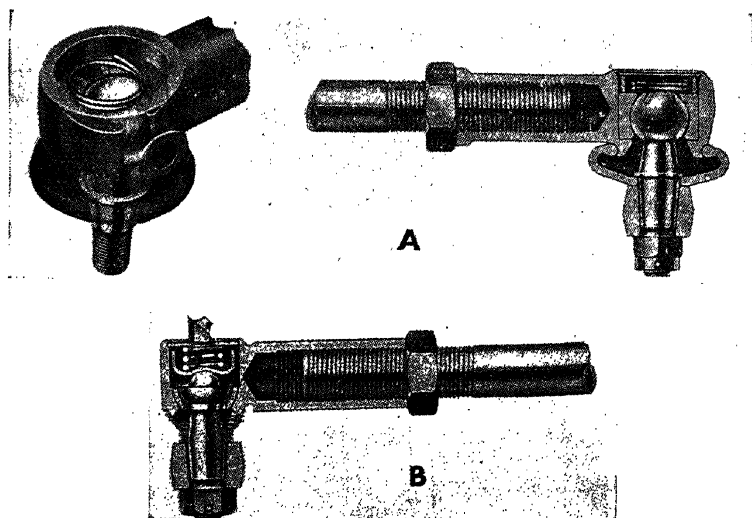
Two types of Automatically Adjustable Ball and Socket Joints.
